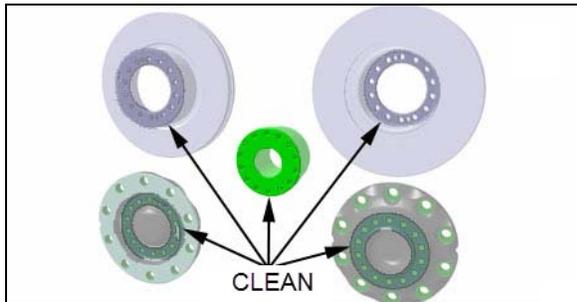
CLEANING HUB BEARING, ROTOR AND HUB FLANGE CLAMPING SURFACES
